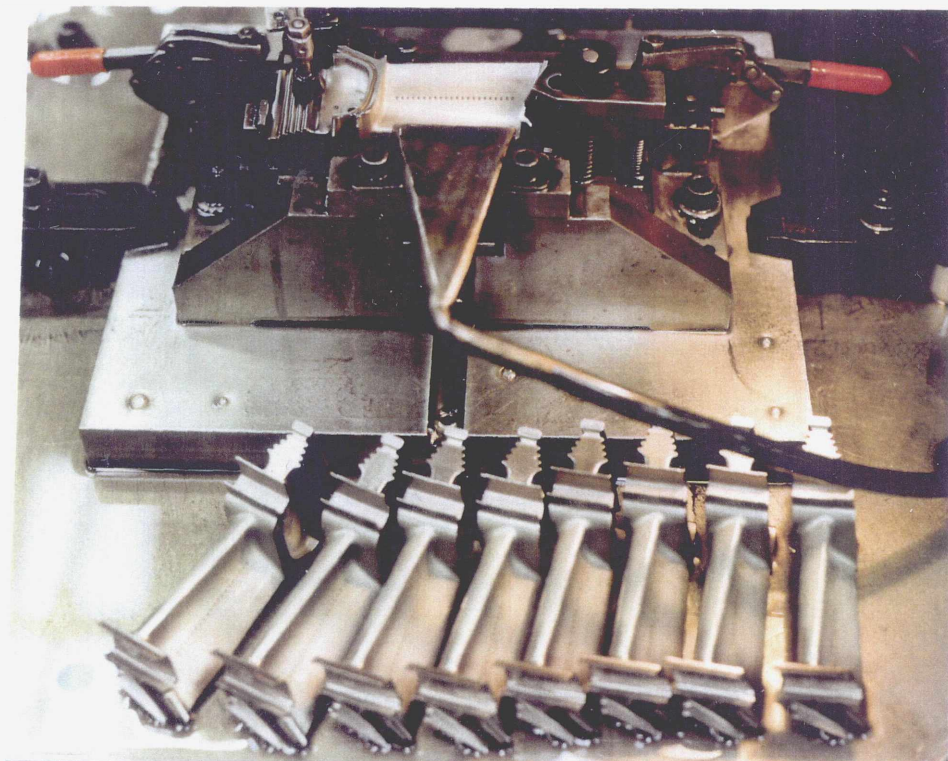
Electro-Discharge Machining of Blade Film Cooling Holes
